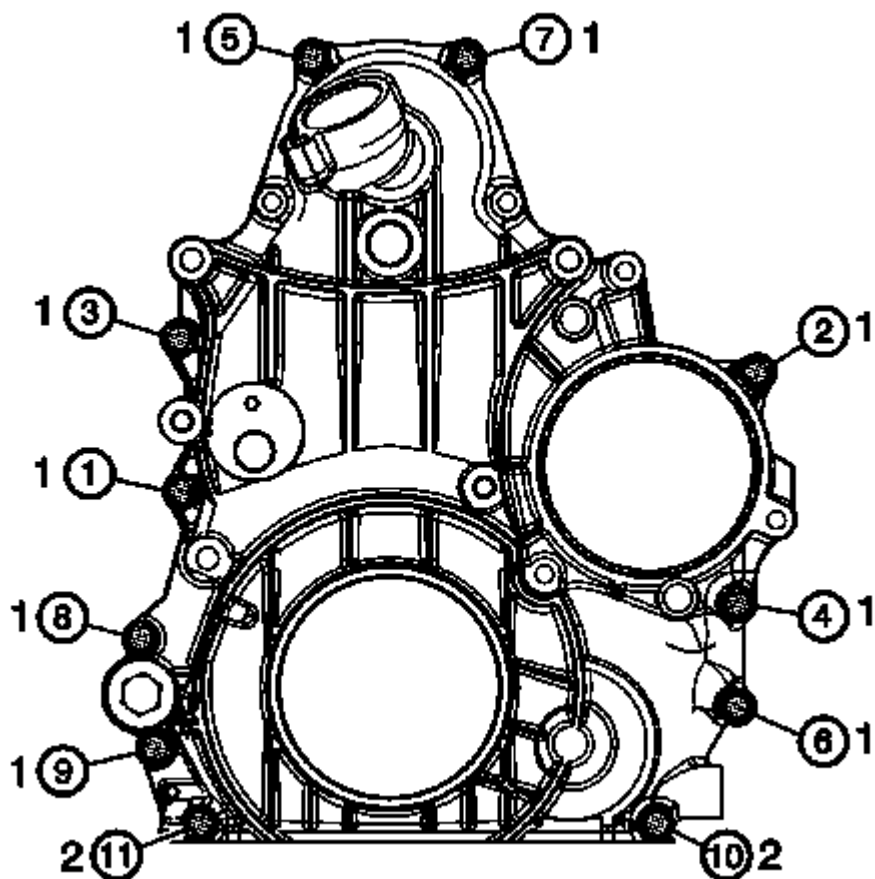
Identifying Engine Front Cover Bolt Tightening Sequence
